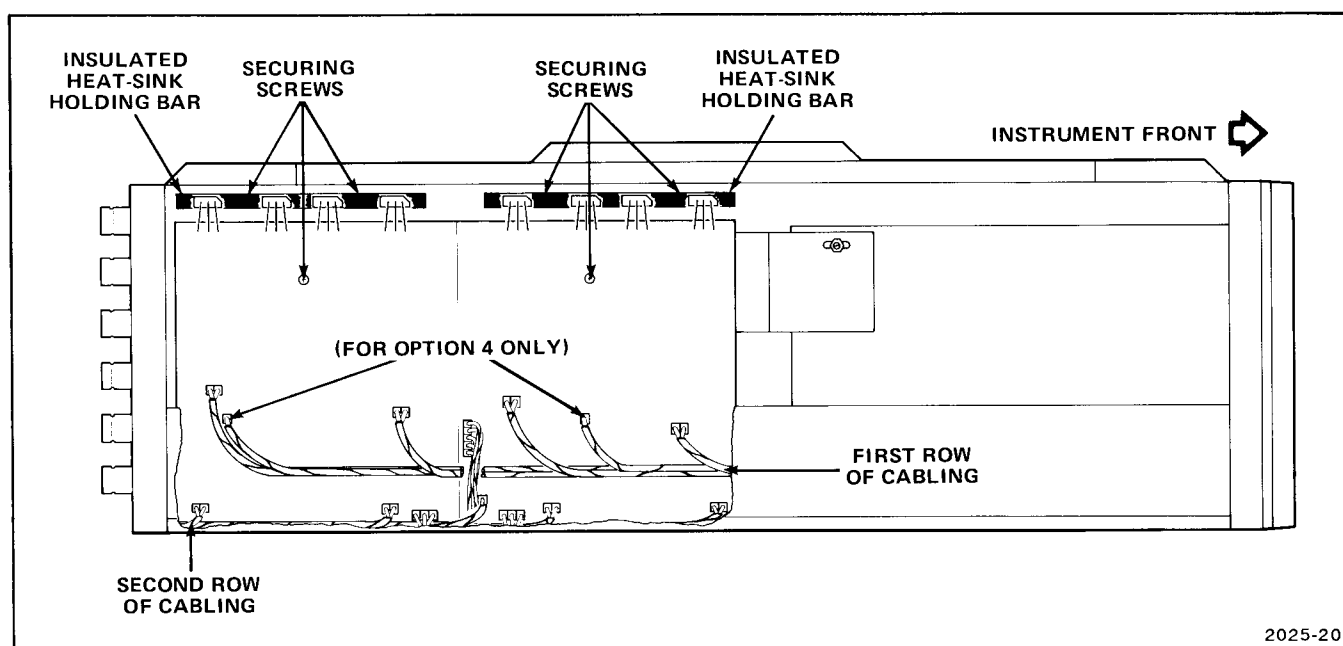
A1—Deflection Amplifier board removal and replacement.
